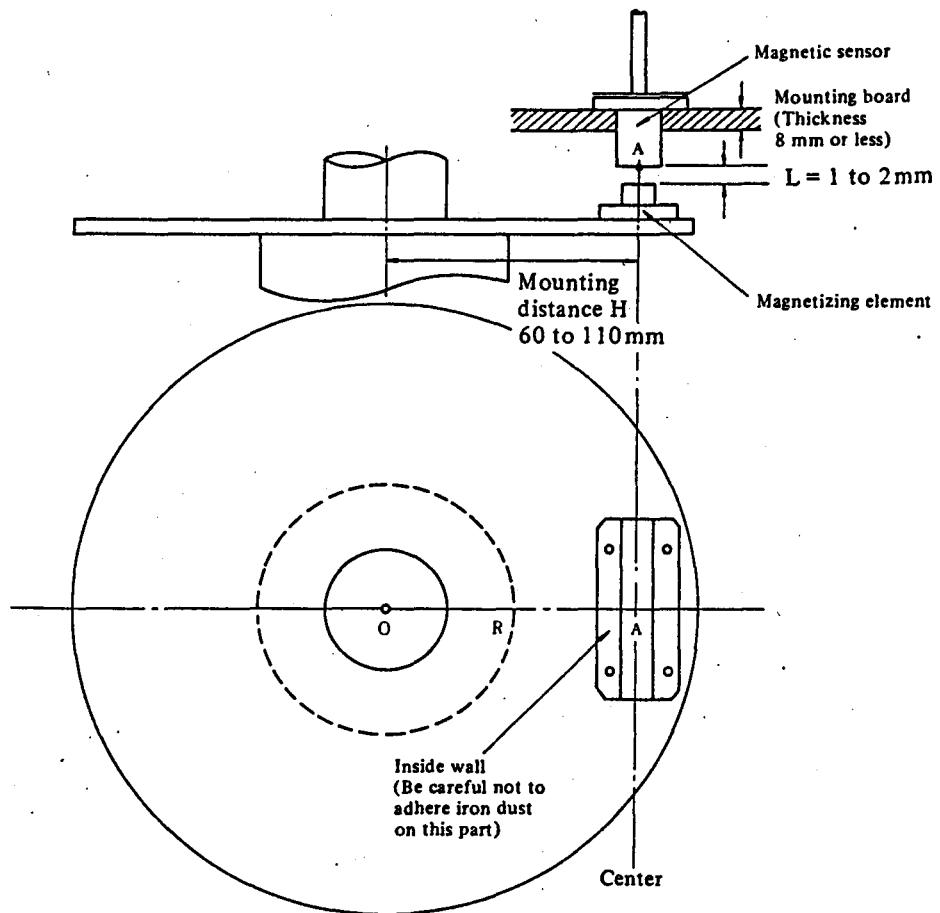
(c) Magnetic sensor mounting example (3) (When mounted on disk)
